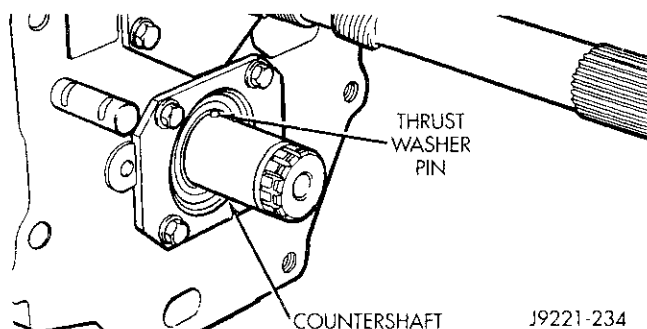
Installing Fifth Gear Thrust Washer Pin
